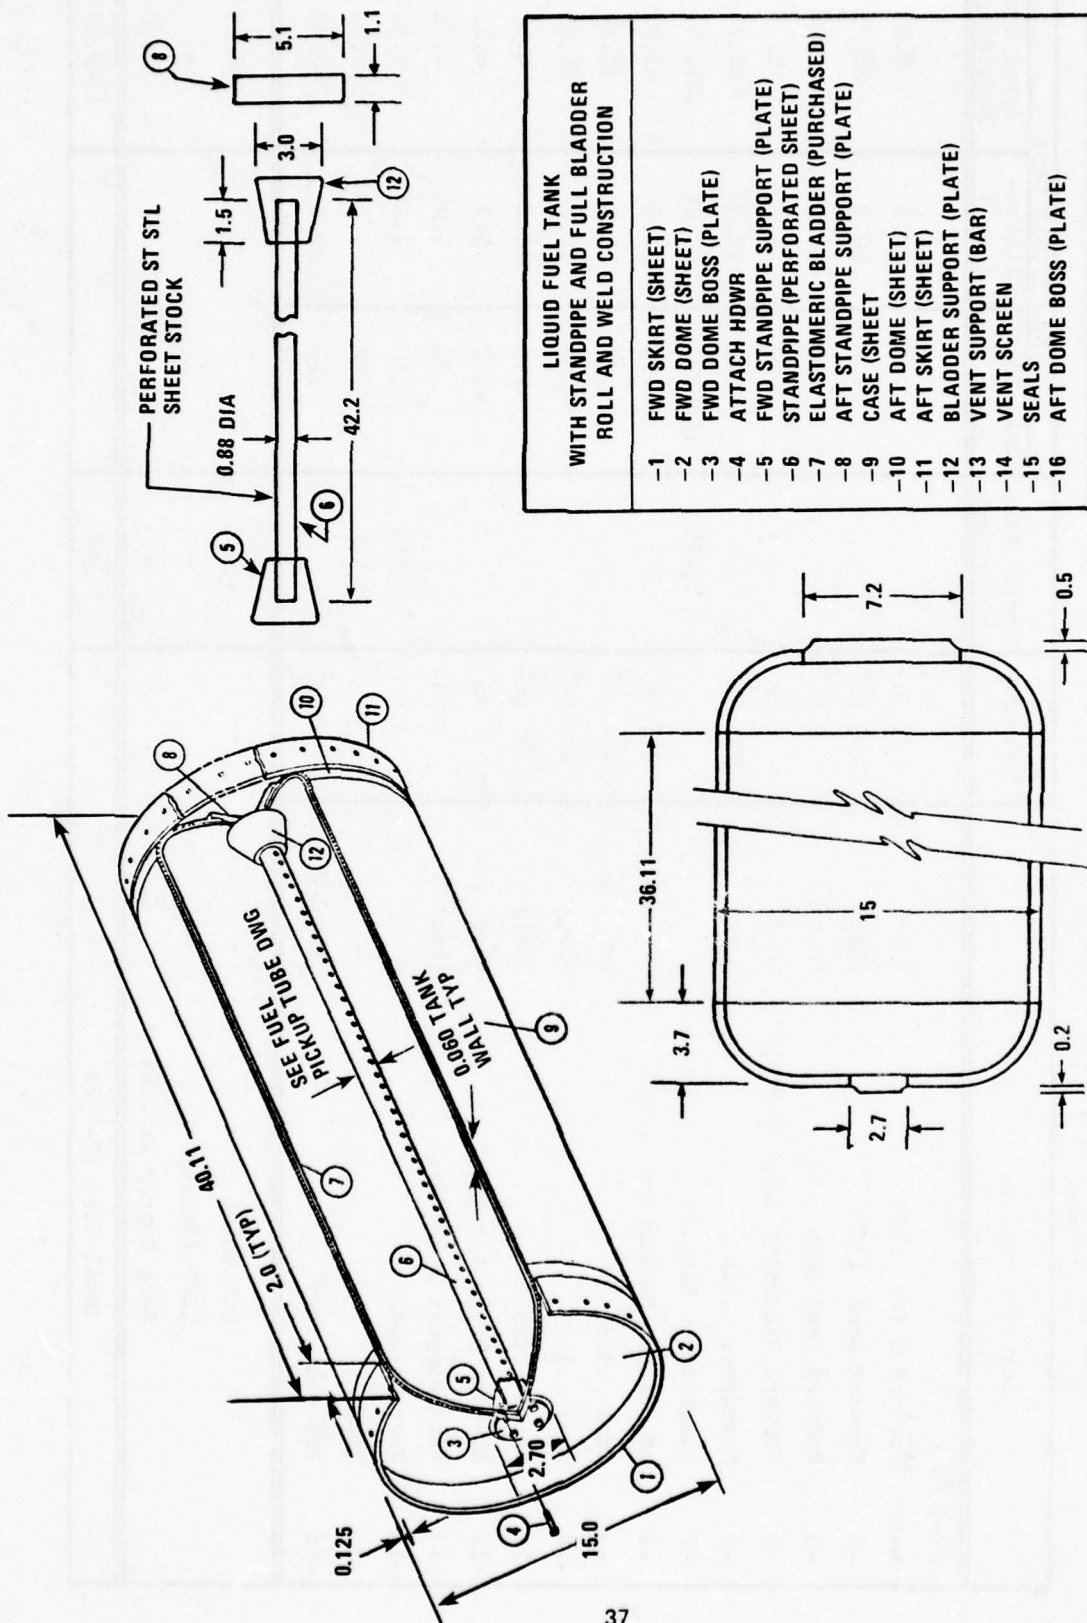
FUEL TANK WITH STANDPIPE AND FULL BLADDER - ROLL AND WELD CONSTRUCTION
